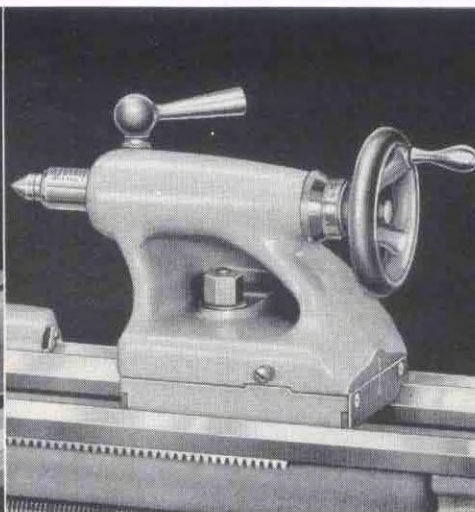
Tailstock Design Used on 10" Swing Lathes
